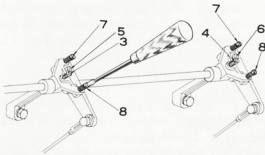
Accelerator Linkage Adjustment No.2 G0327
